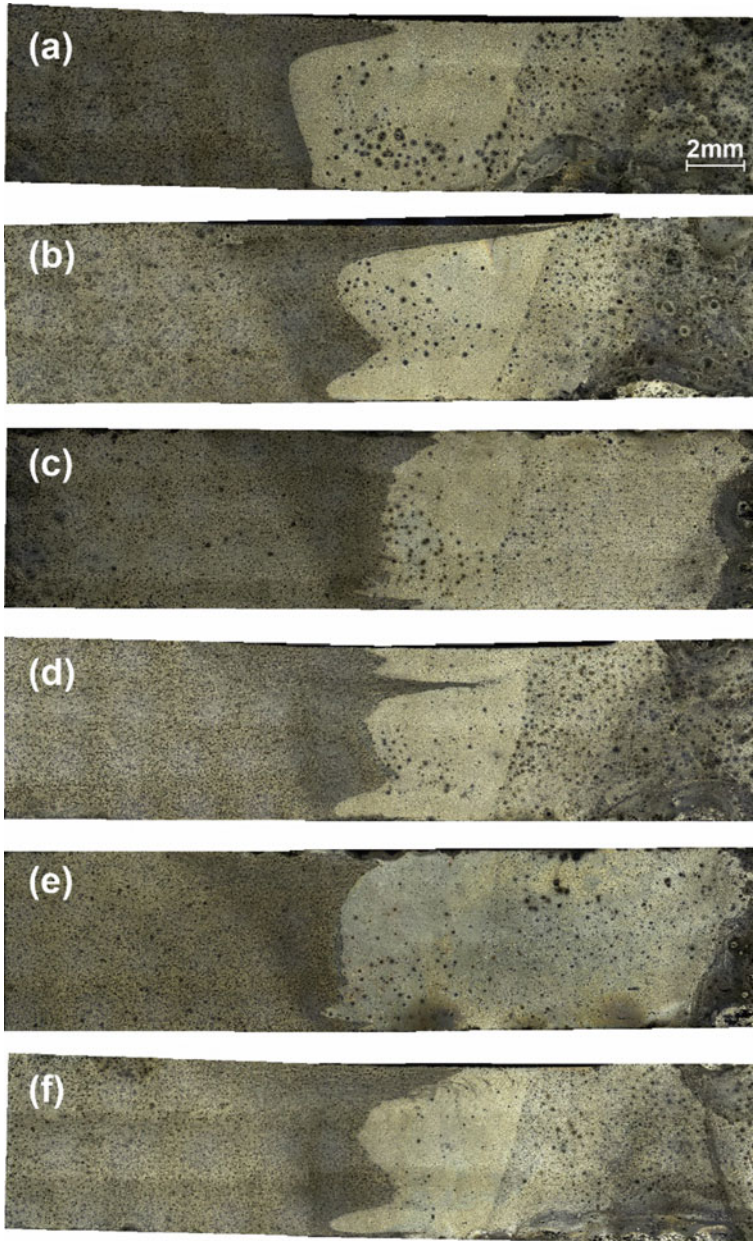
Corroded morphologies after immersion corrosion tests at different welding speeds: a 33.3 mm/min, b 66.7 mm/min, c 100 mm/min, d 200 mm/min, e 300 mm/min, and f 600 mm/min
